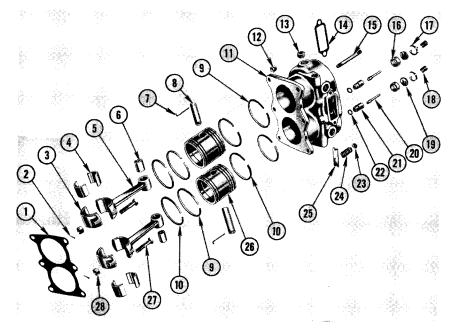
CYLINDER BLOCK, EXPLODED
